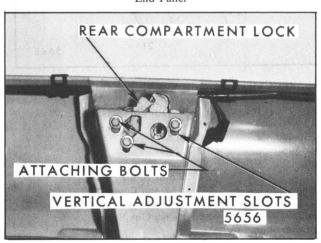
Rear Compartment Lock - "H-11, 77" Styles
